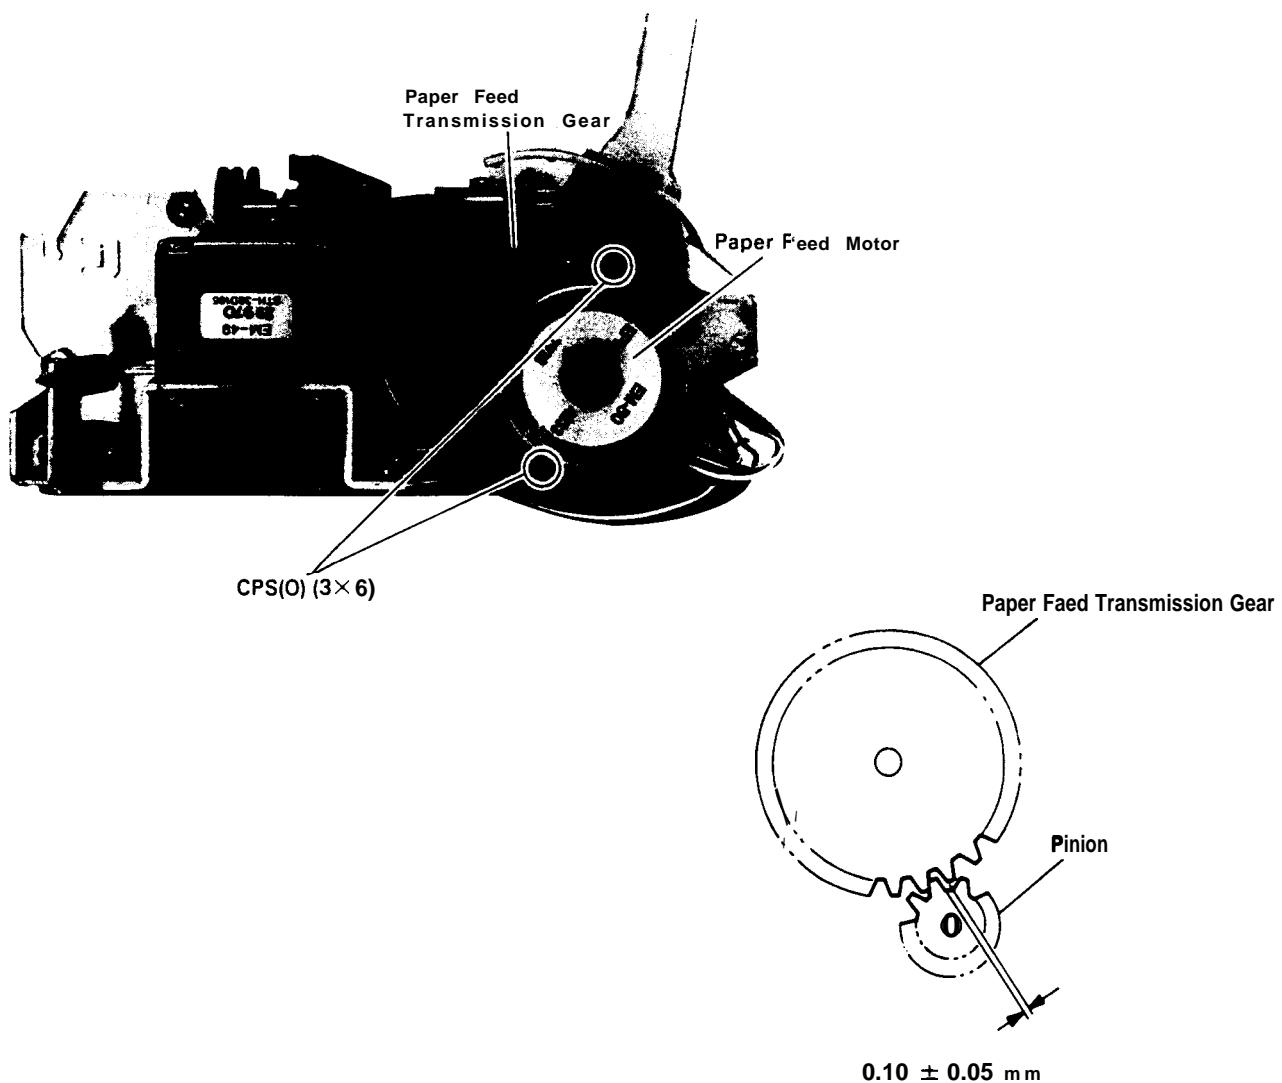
Paper Feed Motor Pinion Gear Backlash Adjustment
